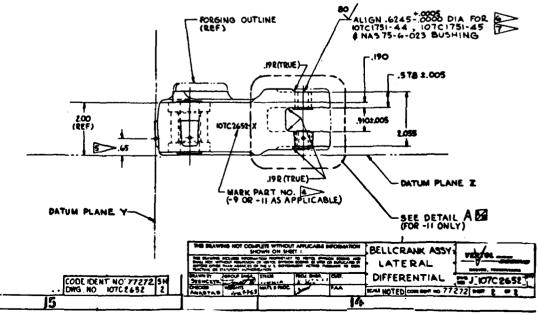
Drawing 107C2652, Lateral Differential Bellcrank Assembly (Sheet 3 of 3)
